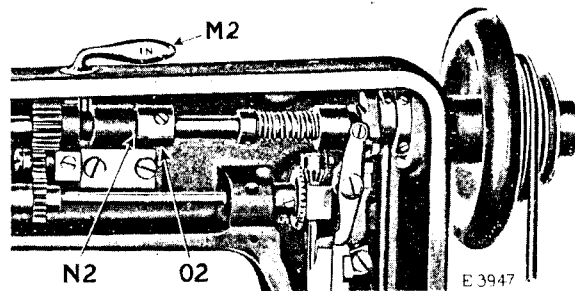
Showing Lever for Engaging and Disengaging Revolving Spool Carrier
